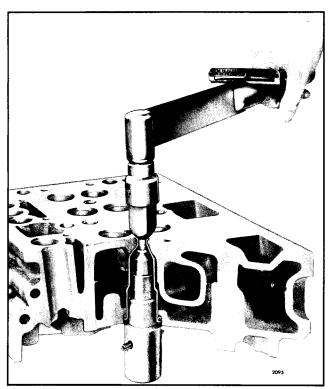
Upsetting Injector Tube using Tools J 5286-4A and J 5286-6
